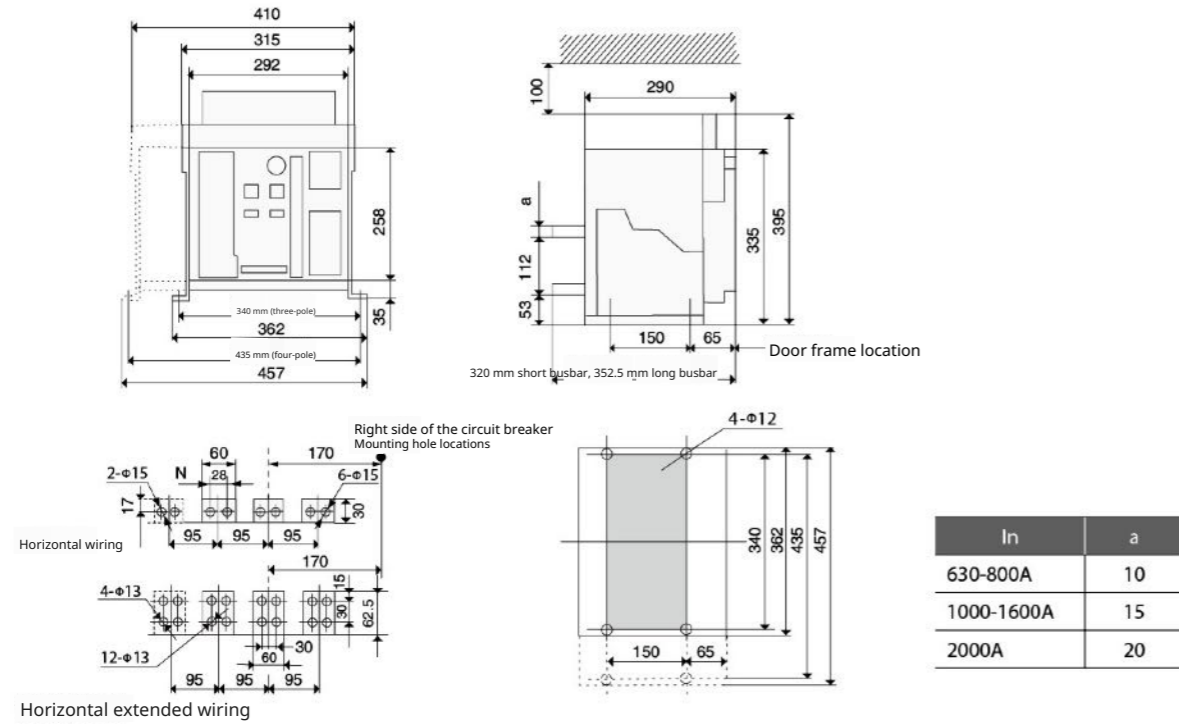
Fixed-type SDW1-2000 Circuit Breaker ( $I_n = 2000A$ , three-pole and four-pole) dimensional drawing
